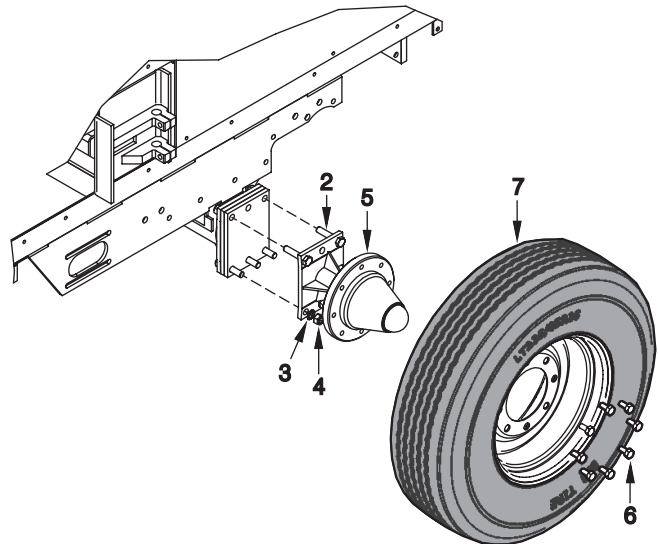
Mounting Hub, Spindle and Tire
